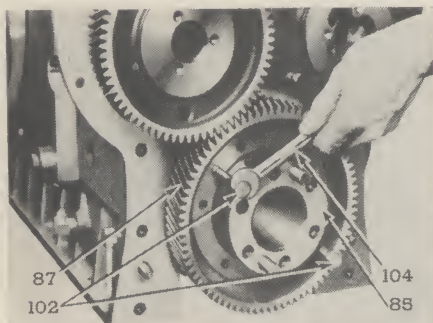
A—A GM engine showing use of two cap screws (102) for removing crankshaft gear (87).
